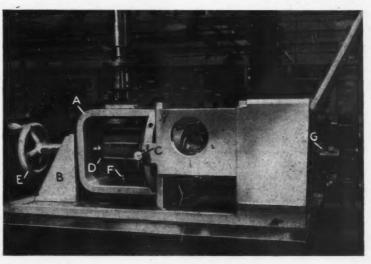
Close-up view of the fixture on the Archdale radial drilling machine. At the right may be seen the air-operated tools for drilling the holes in the flange while the other operations are being performed
